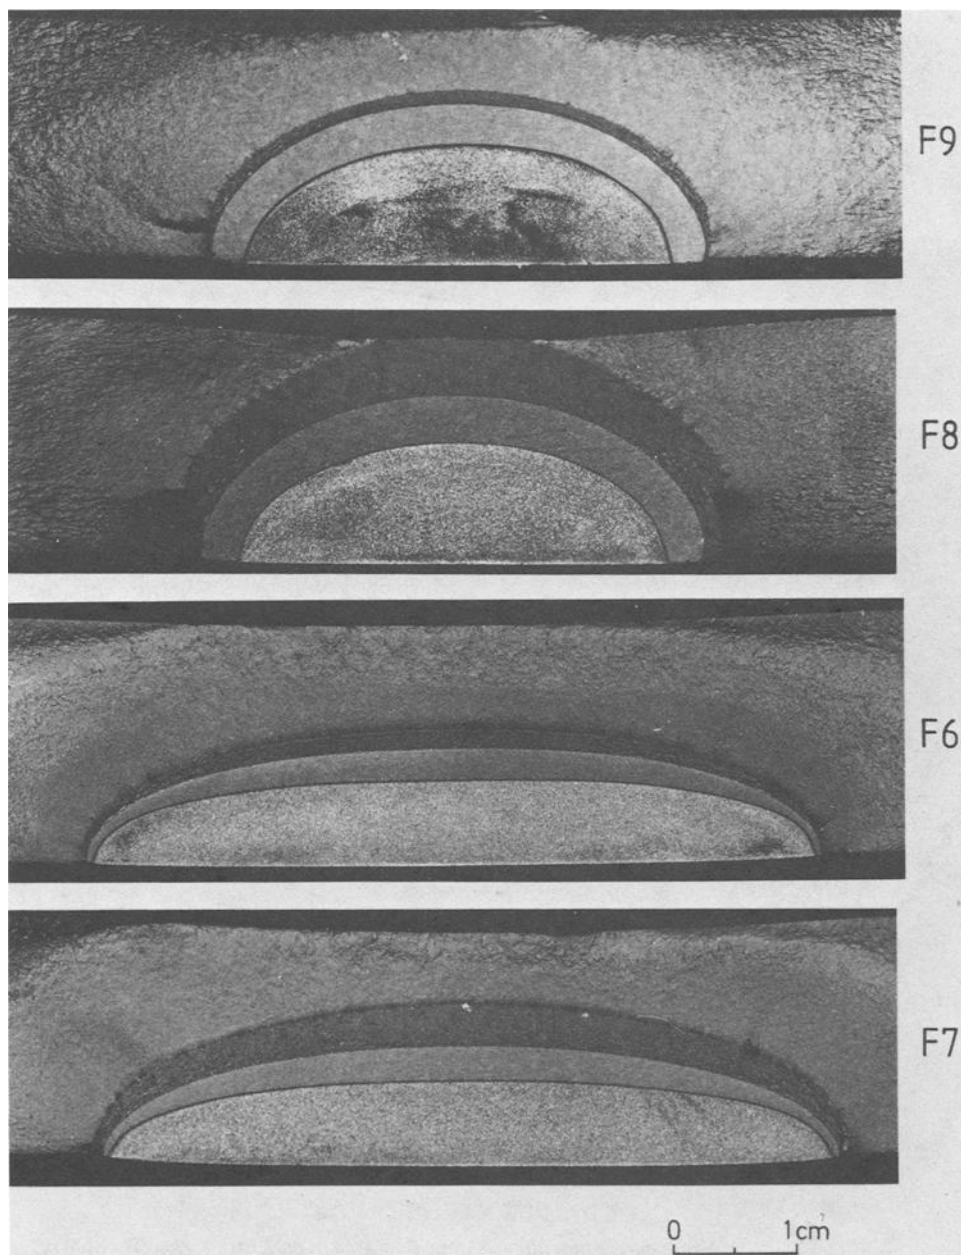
Fracture surfaces of tension plates with surface cracks.
